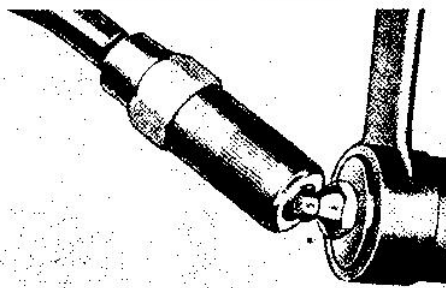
Disengaging the 6594 Gun from Hydraulic Fitting.
